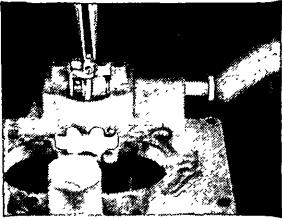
Install pump arm and collar, metering rod arm and screw, and pump arm spring
